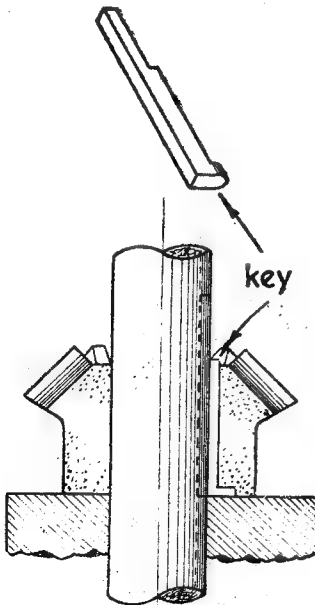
Keying a bevel pinion to a drilling machine spindle
